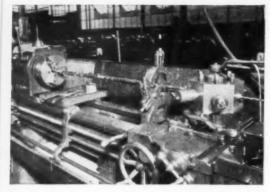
Drilling the hardened end of a Rolls-Royce camshaft preliminary to rifle-drilling. A speed of 700 rpm is used.
